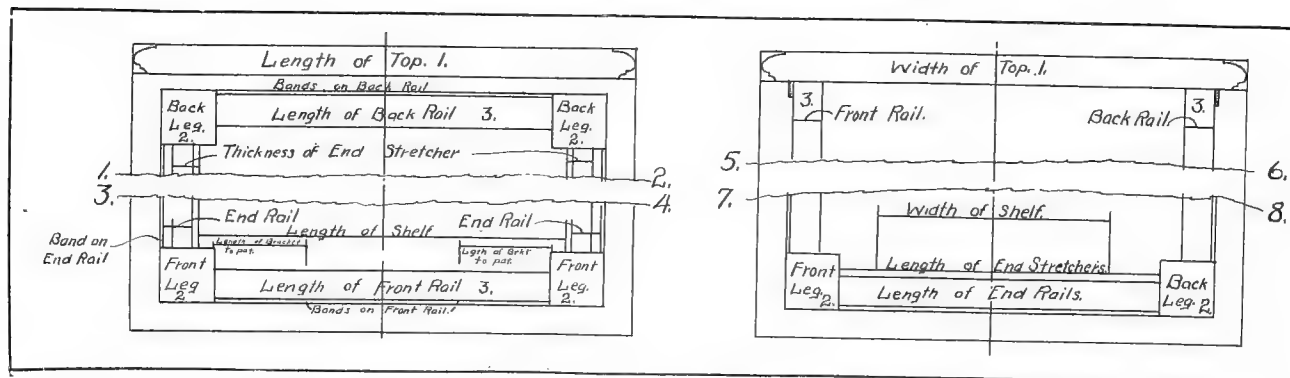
One Side of Rod Showing "View of Widths" and "View of Depths."
